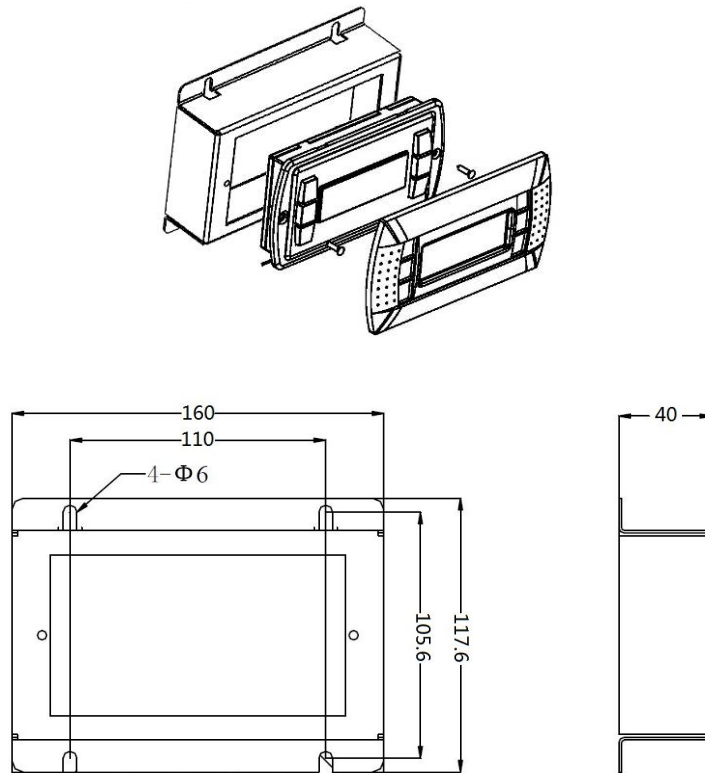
Dimension of remote control mounting bracket (unit: mm)
